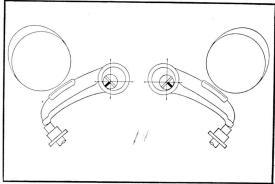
The cam follower shaft direction in time of the camshaft assembling
